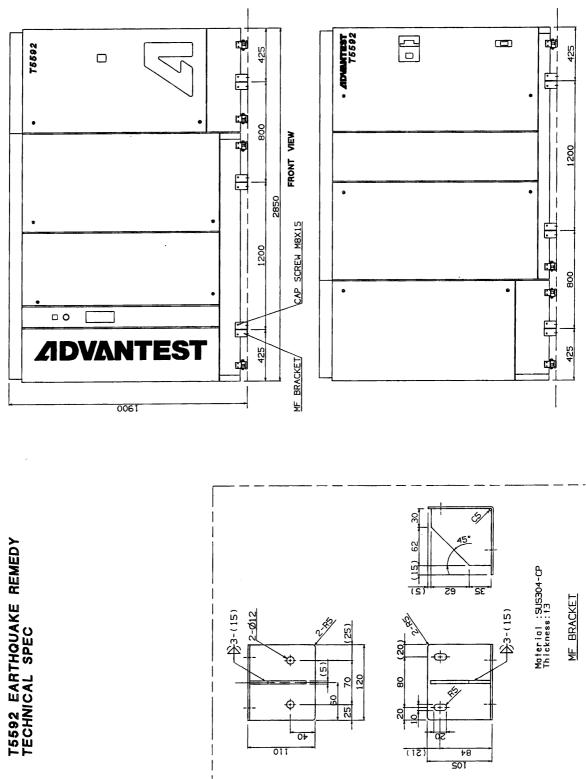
T5592 Earthquake Remedy Technical Spec(S Type Chiller)
